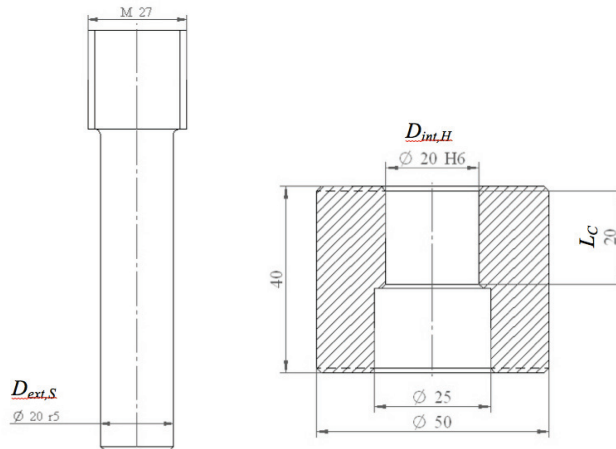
Geometrical dimensions of the specimens in millimeters: shaft made of steel (left) and hub made of aluminium (right).
